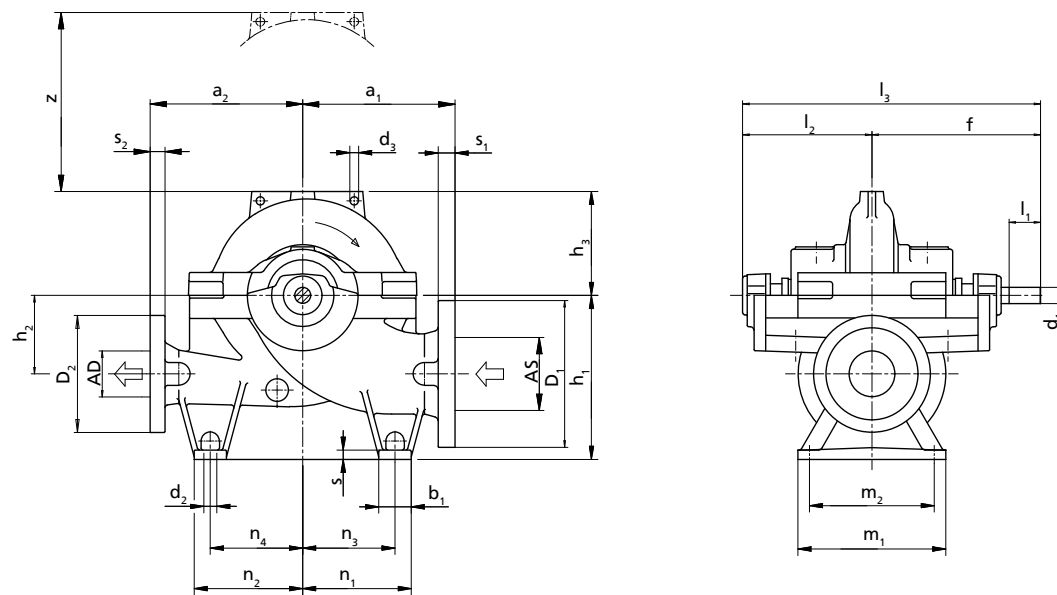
Dimensions: Omega, horizontal installation, Fig. 0 (bare-shaft pump)
